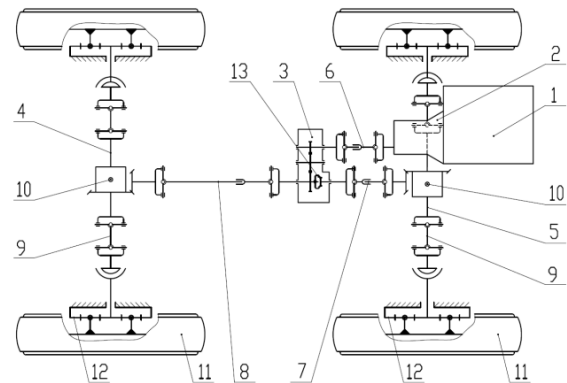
Power drive design of the complete frame forklift family with two drive and steering axles, where: 1. ICE; 2. Hydrodynamic gearbox; 3. One-stage distribution gearbox; 4. Front drive axle; 5. Rear drive axle; 6. Cardan coupling; 7. Cardan coupling; 8. Cardan coupling; 9. Synchronous cardan coupling; 10. Differential of front and rear drive axles; 11. Wheel drive; 12. Endwheel reduction gearbox; 13. Coupling for enabling/disabling of the rear drive axle.
